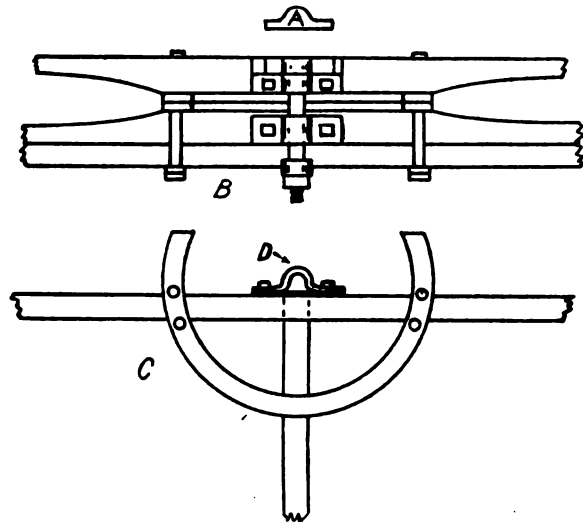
FRONT ELEVATION AND TOP PLAN VIEW, SHOWING KING BOLT ARRANGEMENT.
